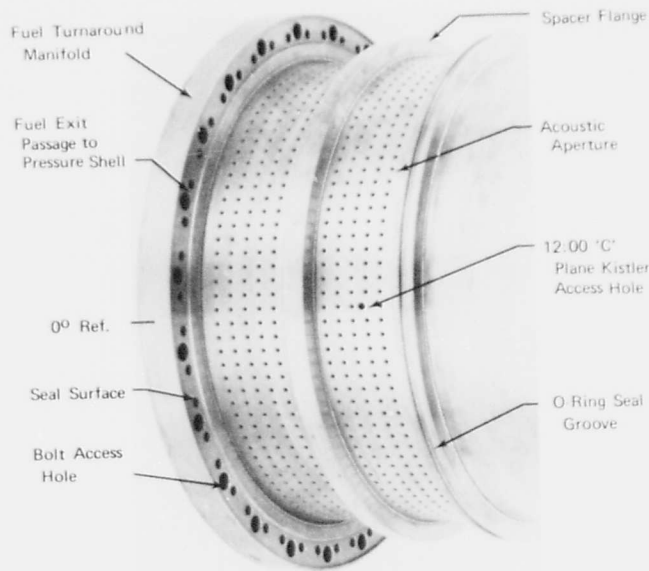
Flightweight Chamber with Acoustic Liner Pressure Shell Removed FE 97367A
